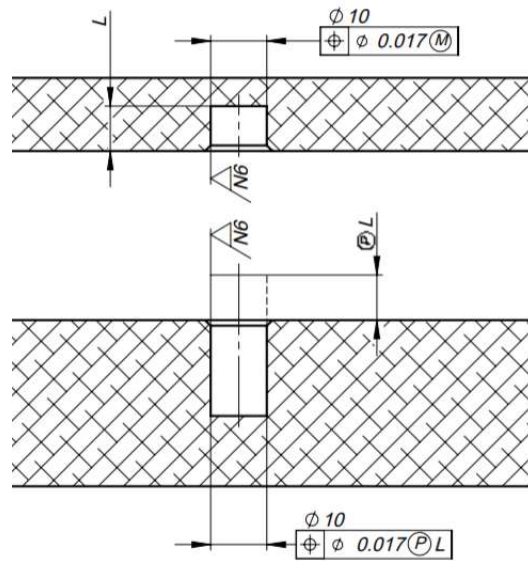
Dowel Pin Holes Geometric Tolerancing
